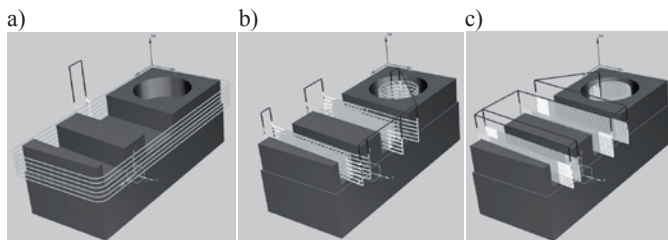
Tool paths in consecutive stages of milling: a) outer surface roll forming, b) rough milling of ribs and circular pocket, c) roll forming of ribs and circular pocket
